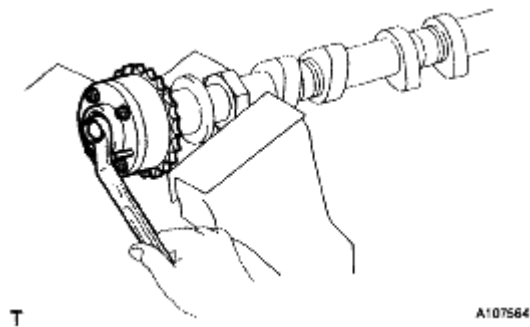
Checking Camshaft Timing Exhaust Gear Lock
